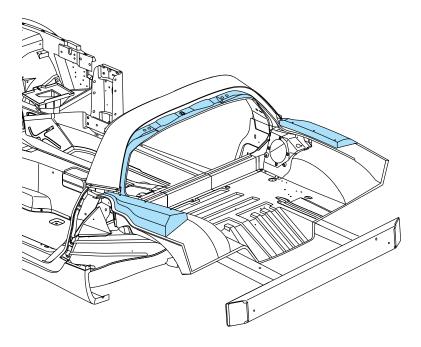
Frame-Rear Compartment Panel Sectioning
